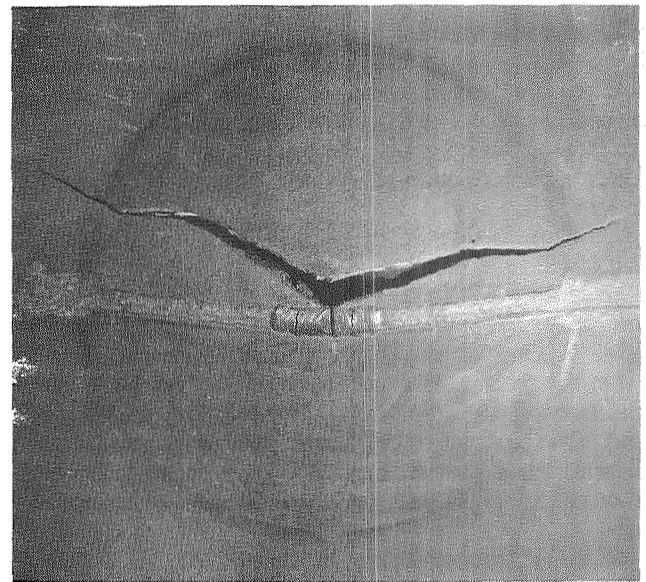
Explosion Bulge Crack Starter Test Results of HTS Welded to HY-80 (One-Inch Thick Plates) at 60°F (Furnished by Pellini and Puzak of NRL).
